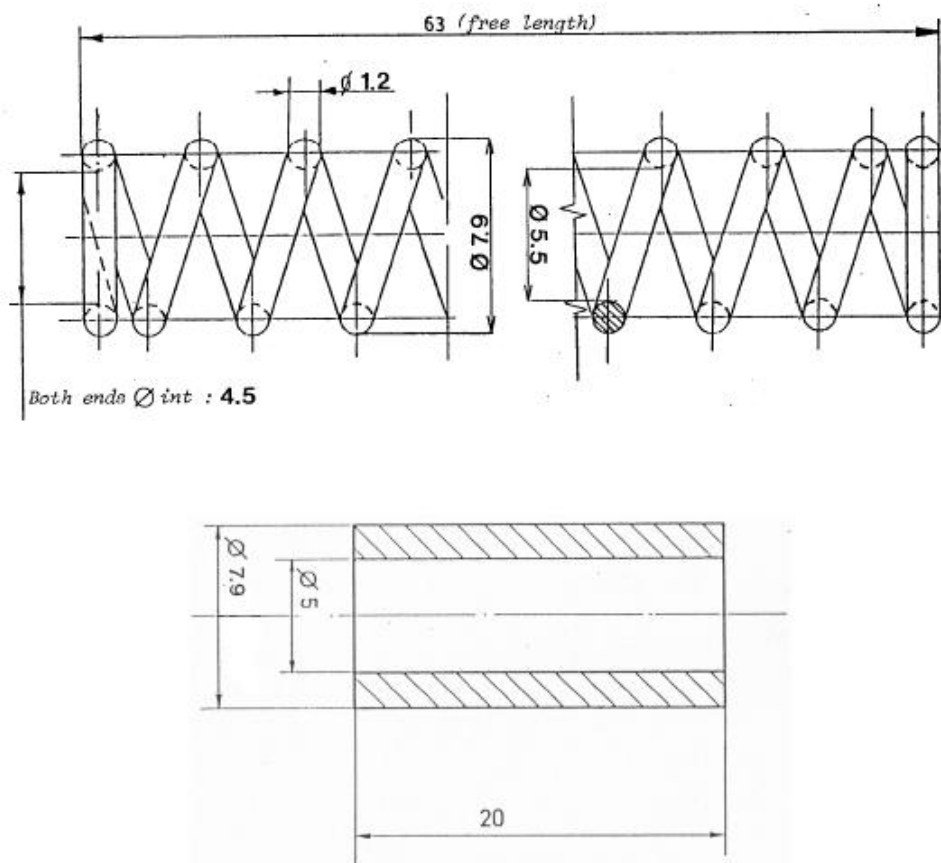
PRIMO Program, rod BD8, hold down spring and spacer tube.
